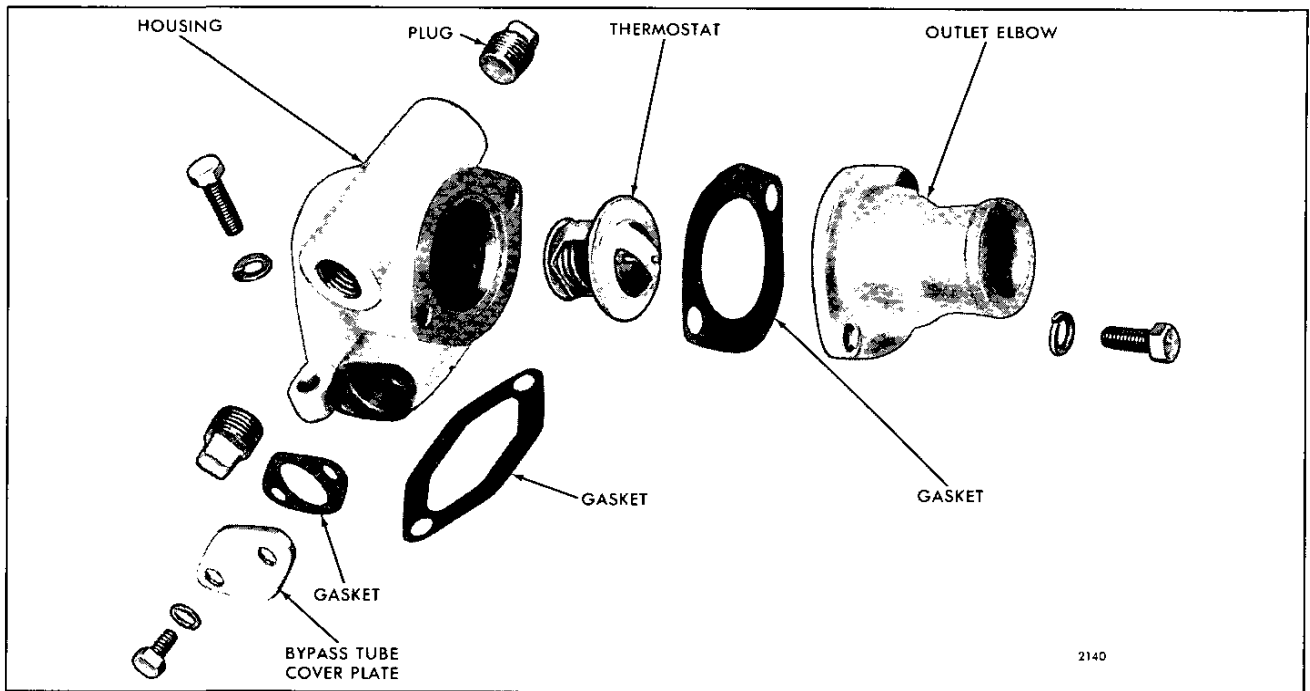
Thermostat Housing Details and Relative Location of Parts (In-Line Engine)
